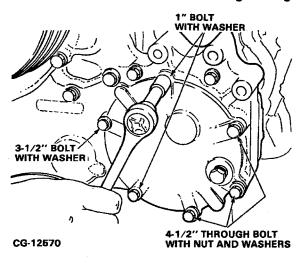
Remove Injection Pump Drive Gear Access Cover Bolts
